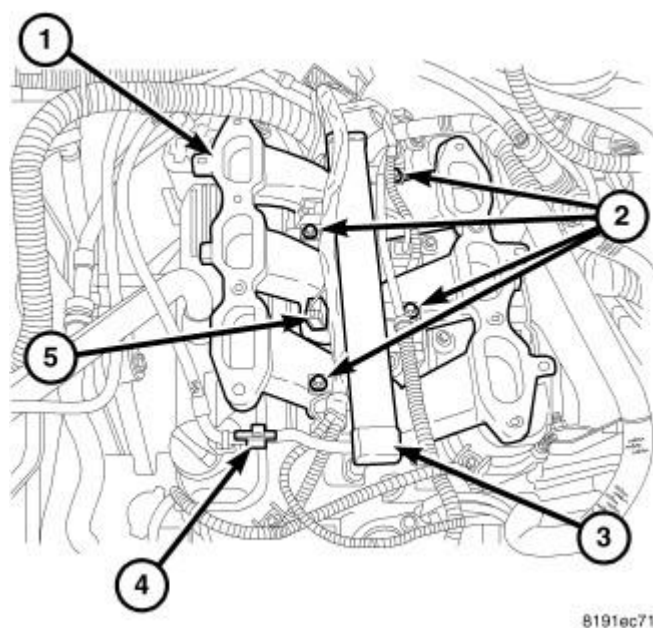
Fuel Injectors, Line, Rail & Fasteners 3.8L
